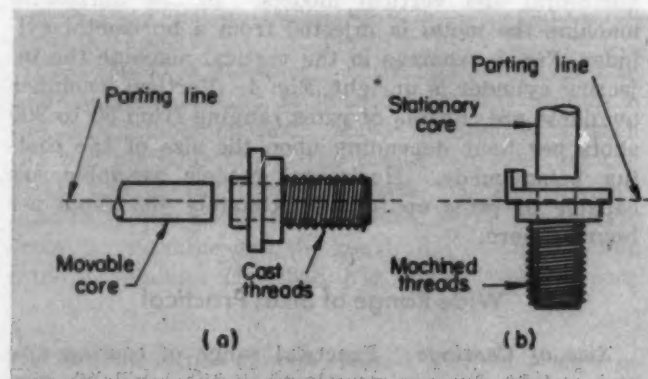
Movable core is necessary with the threaded part (a) whereas a stationary core can be used with (b). In vertical casting, (a) would be favored owing to denser metal as air would be entrapped with die (b)
